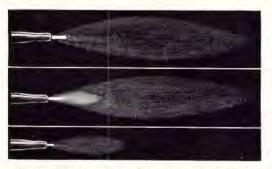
The oxy-acetylene flame. Top illustration shows the neutral flame properly adjusted. Center illustration shows a carburizing flame; excess of acetylene. Lower illustration shows an oxidizing flame; excess of oxygen. All are required in oxy-acetylene welding work.
